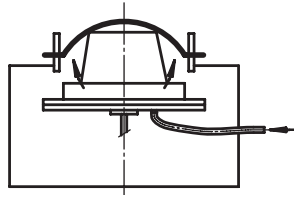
Preforming with preblow (this is not possible in all thermoforming machines)
